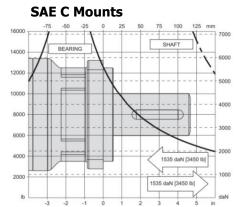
SAE C Mounts Allowable shaft load/ bearing curve
